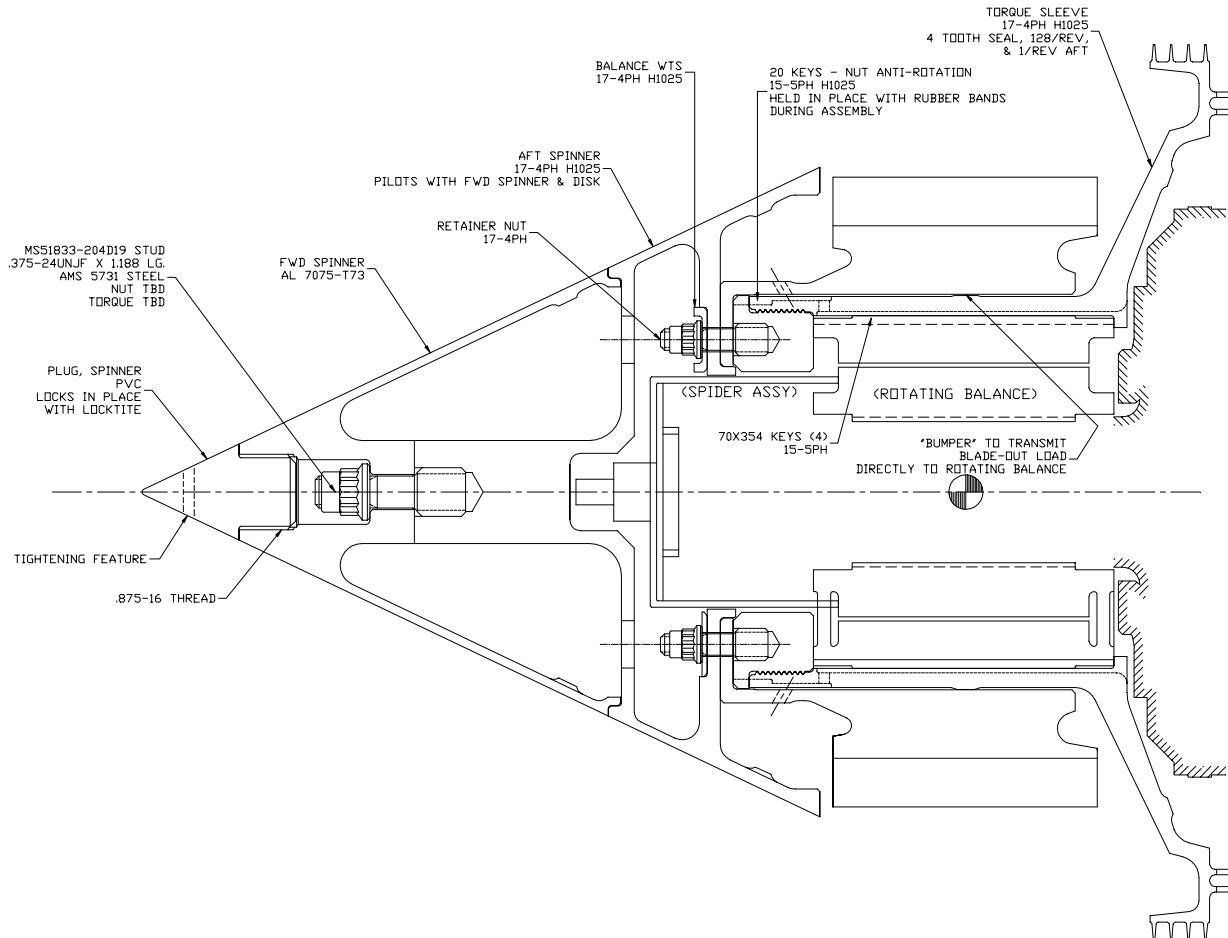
The QHSF Final Rotating Assembly Design Features a One-Piece Torque Sleeve and Rotating Seal with a Retaining Nut To Hold the Disk.
